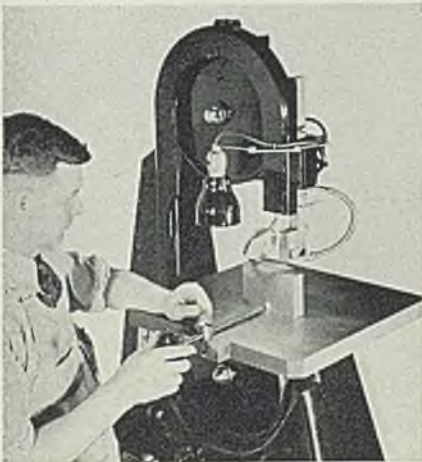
A 3-power magnifying glass mounted on the machine assists in performing close work. A detachable screw feed is available when required
